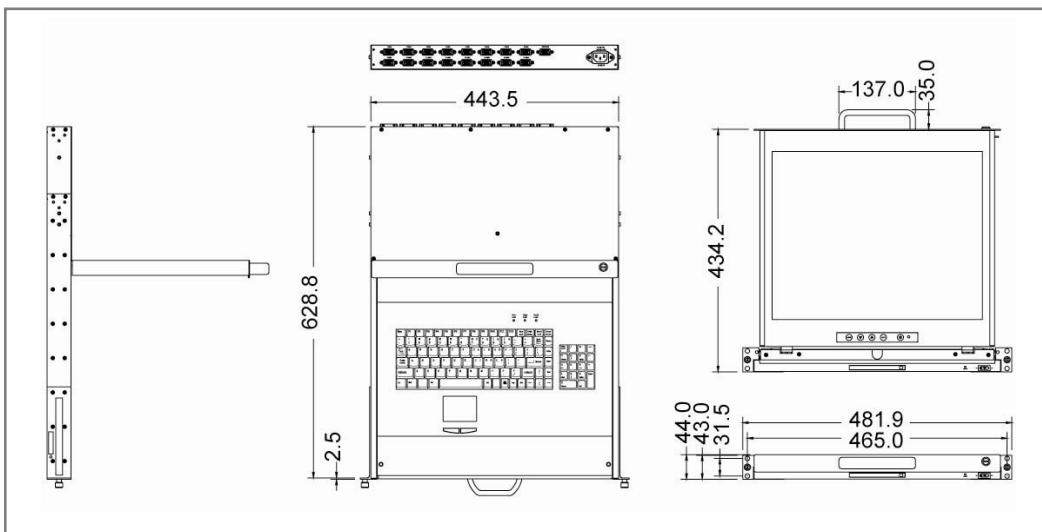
LCD1U19-05-16kvm-n-co Dimension
